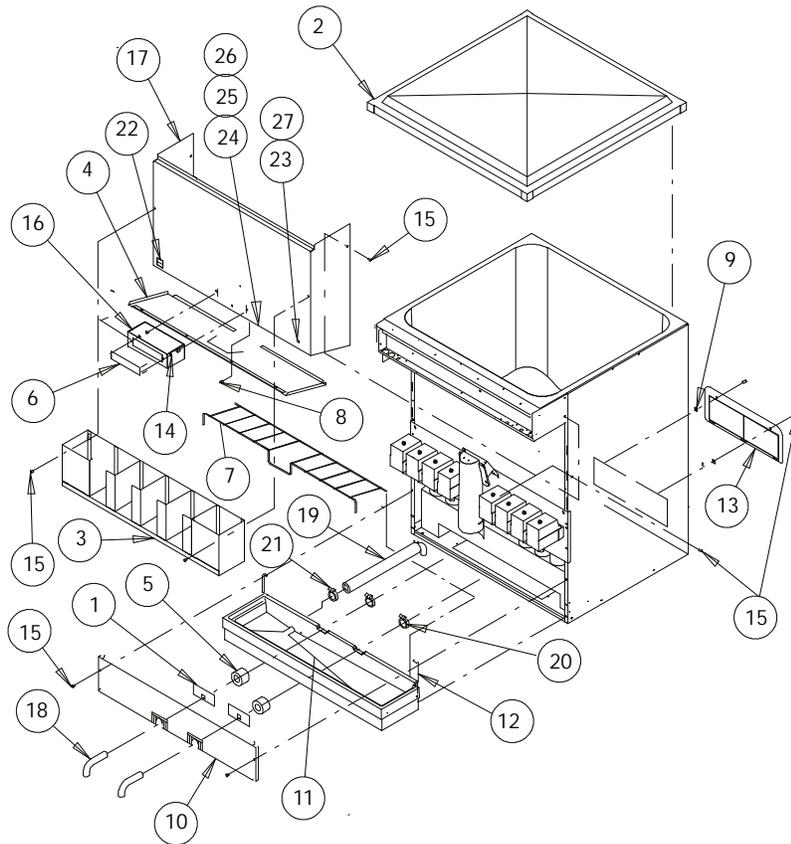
ICE/SOFT DRINK POST-MIX DISPENSER EXPLODED VIEW AND PARTS LIST
